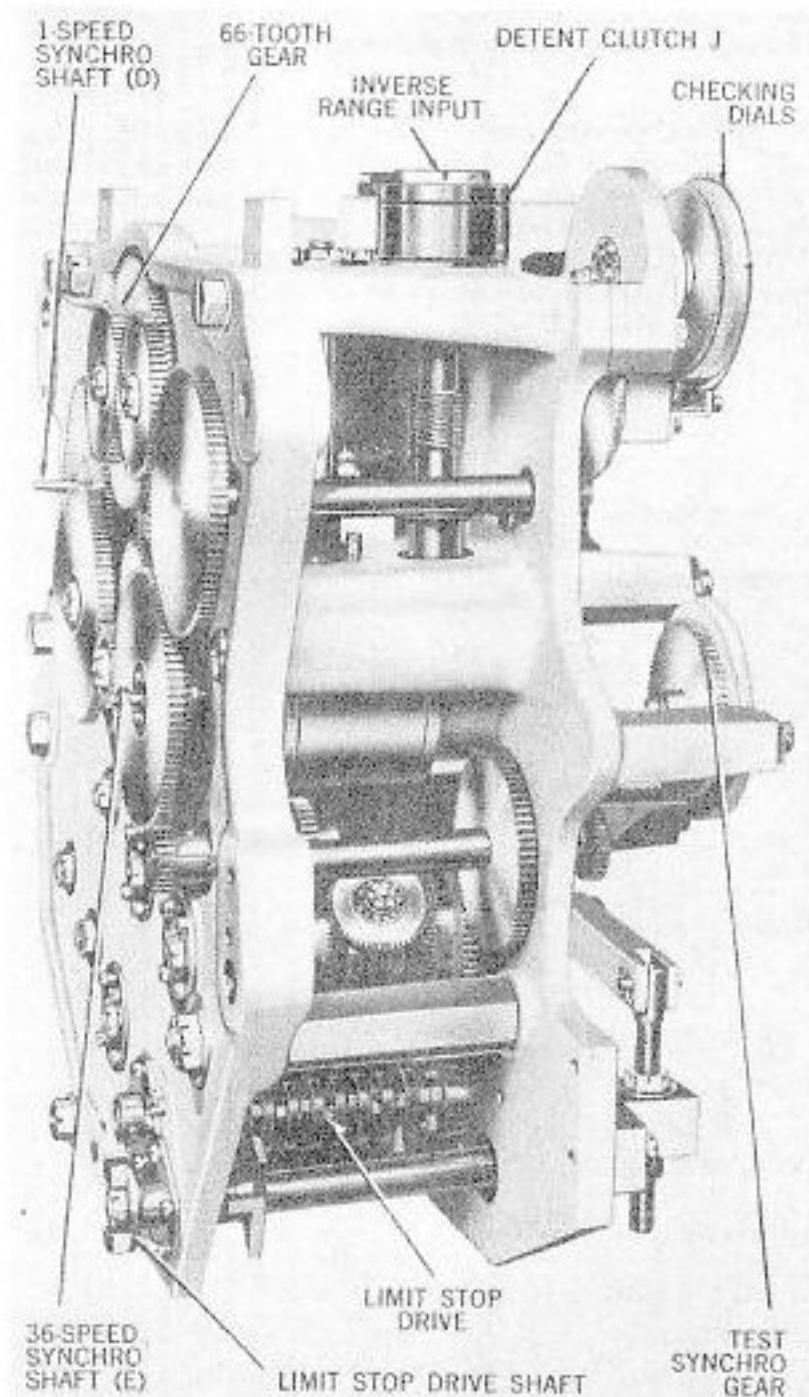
Train Receiver-Regulator Mk 18 Mod 5 Gear Box Assembly, Side View
